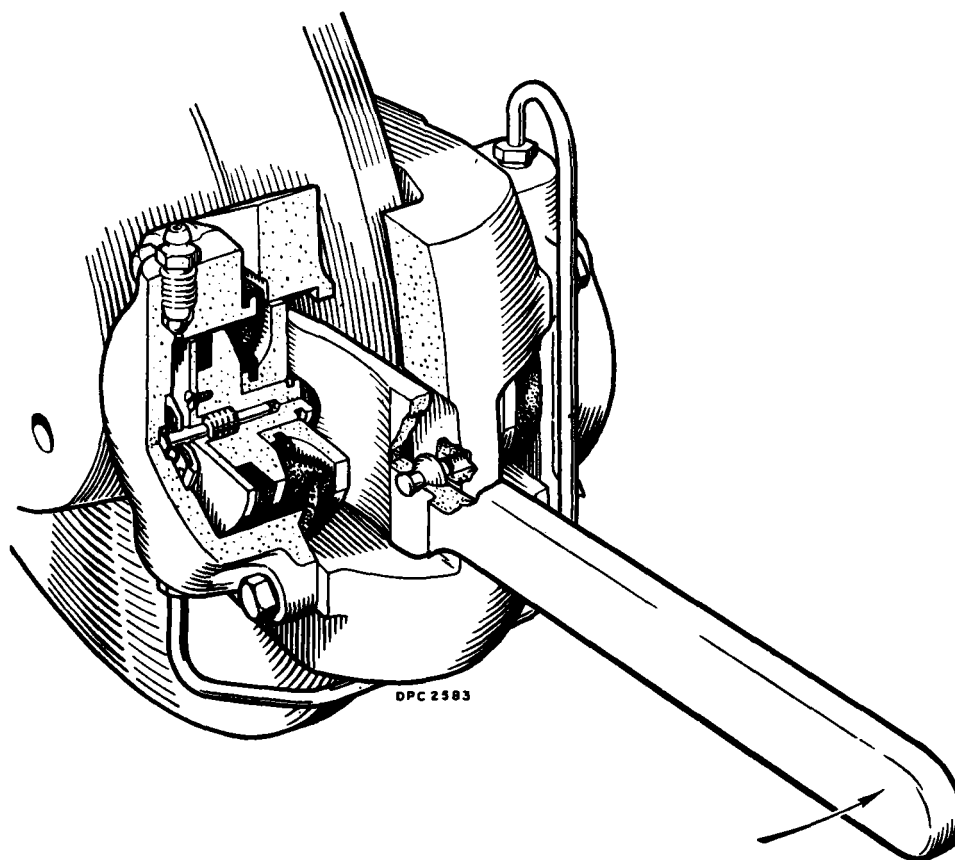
Resetting the pistons with special tool (Part No. 7840).
